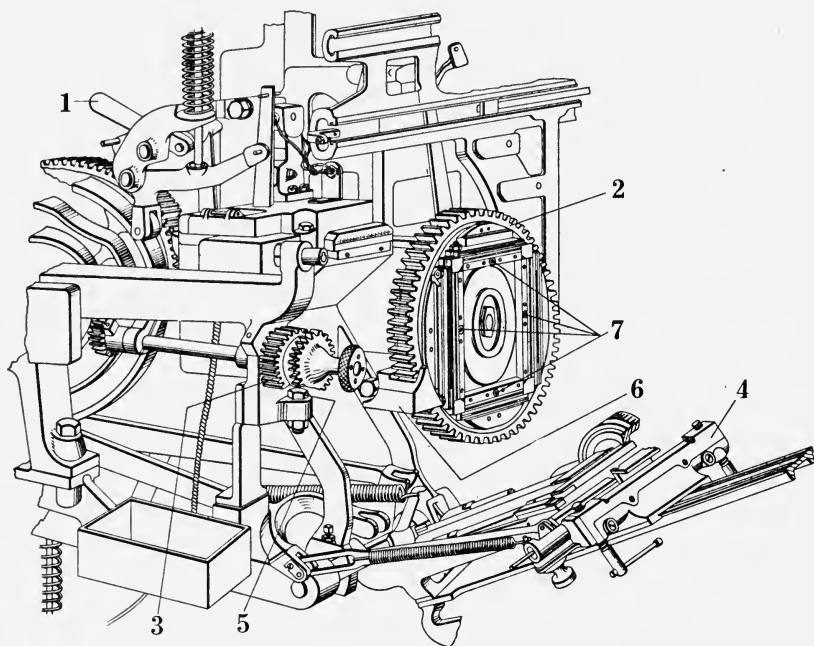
This is a View of the Vise 4 Lowered to Second Position for convenience and accessibility in cleaning out a back squirt, or to do work on the casting parts. The mold slide cam lever handle 1 is depressed in order to disconnect the mold slide so it can be pulled out and the disk 2 will be disengaged from the driving pinion 3. In this position, the disk is free to be revolved by hand. The mold guide support screw is shown at 5. The guide 6 supports the mold slide upon the adjustable screw 5. The guide 6 also prevents the disk 2 springing away while the back knife is trimming the bottom of the slug.
